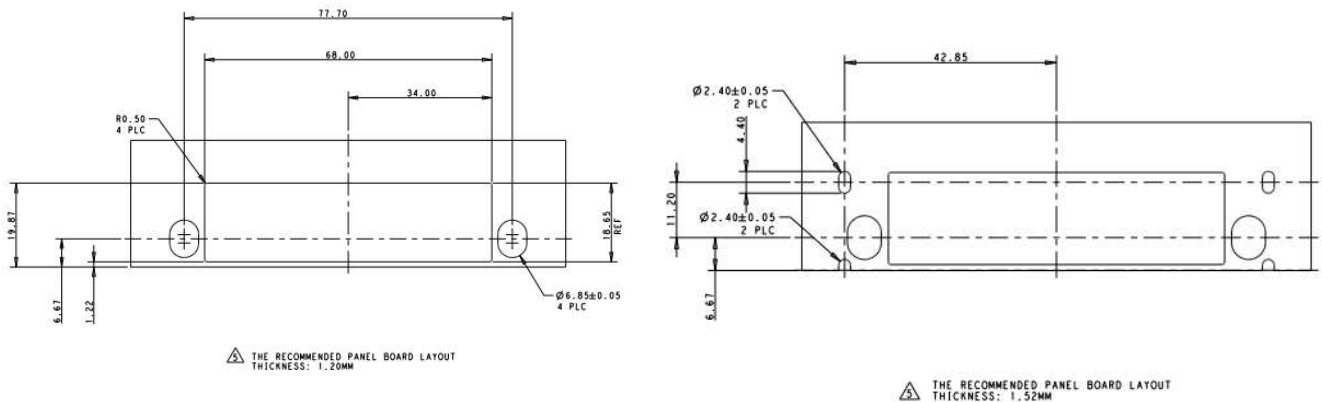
The recommended panel board layout view for Pluggable Bus Bar 125A PCB screw-mount conn
